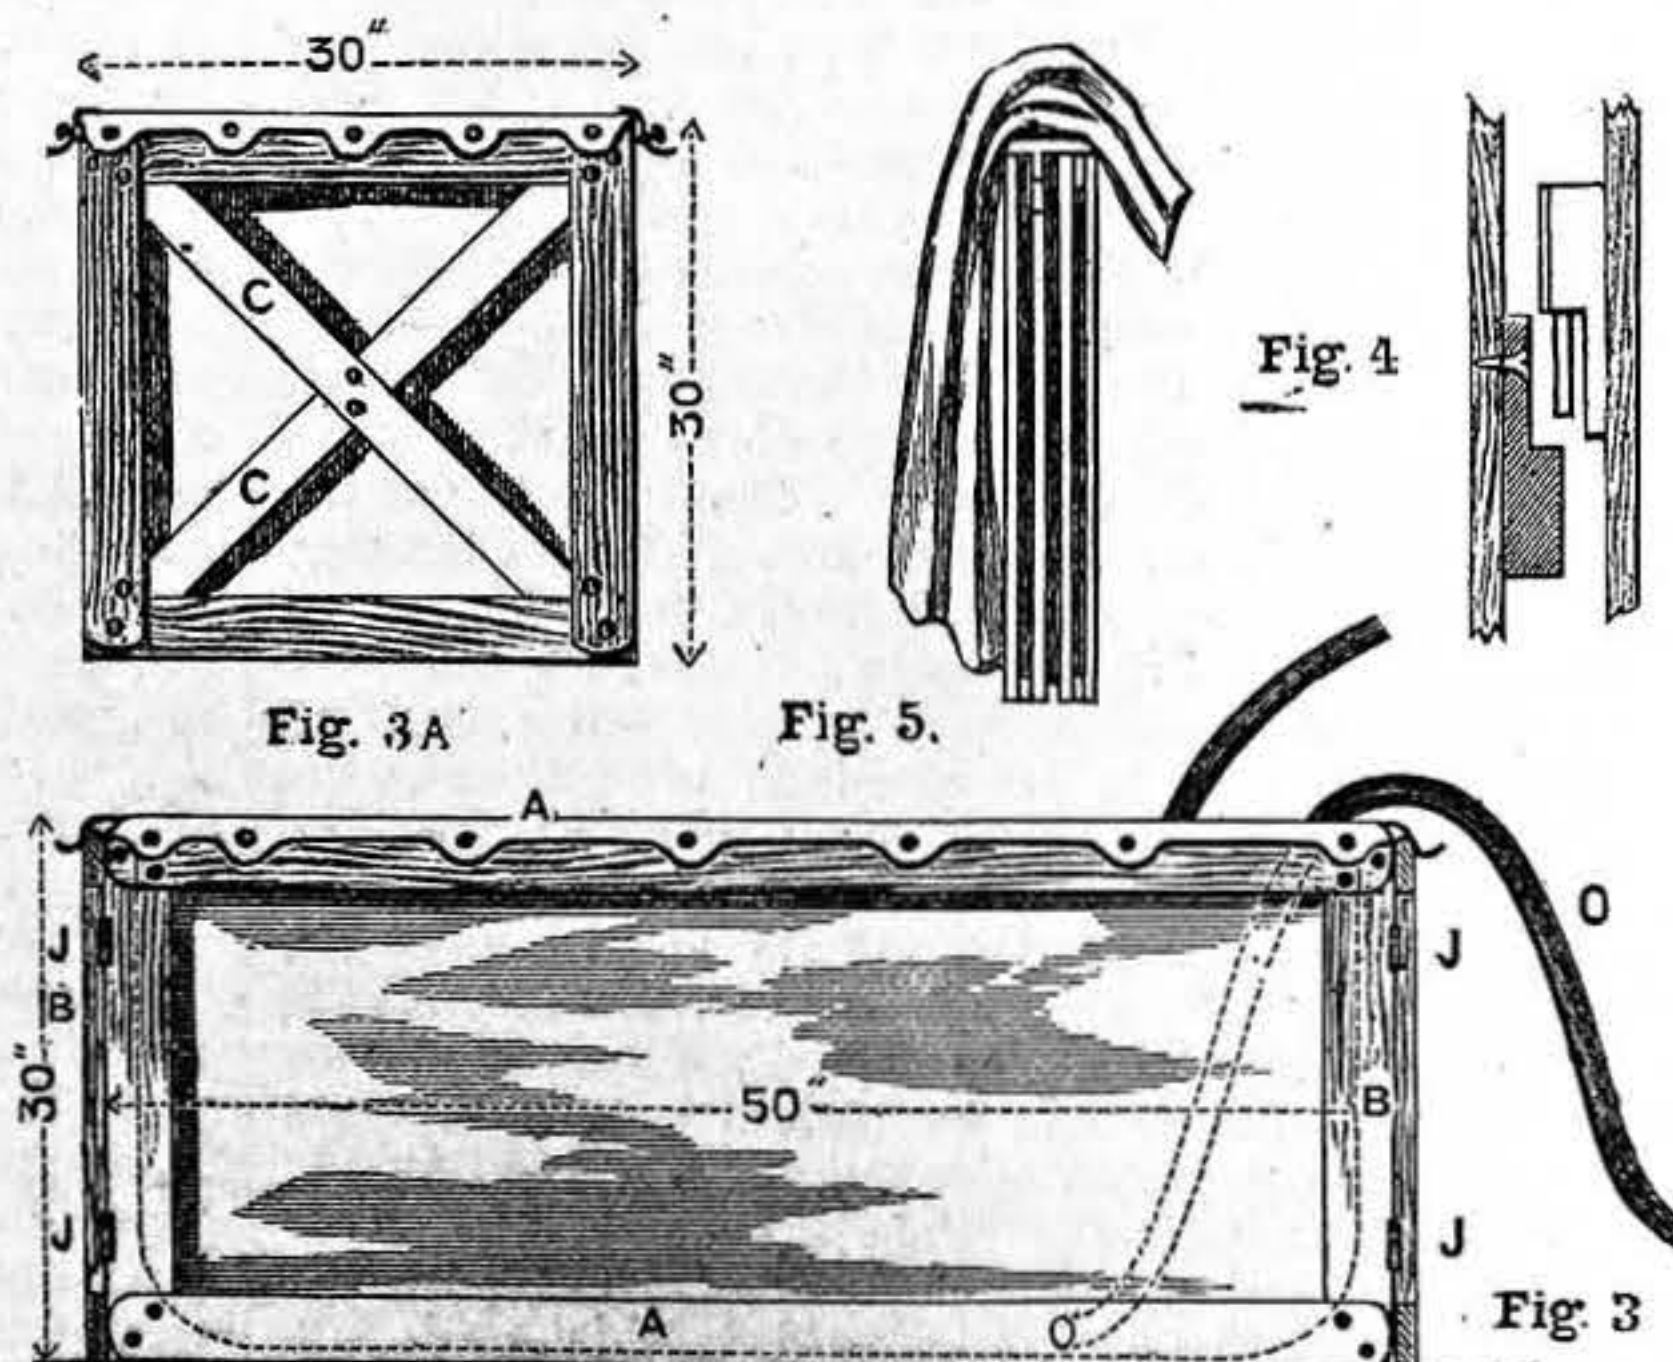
Folding Bath: Side Elevation. Fig. 3 A.—Ditto: End Elevation. Fig. 4.—Butt Hinge Connection. Fig. 5.—Bath Complete: Folded.
